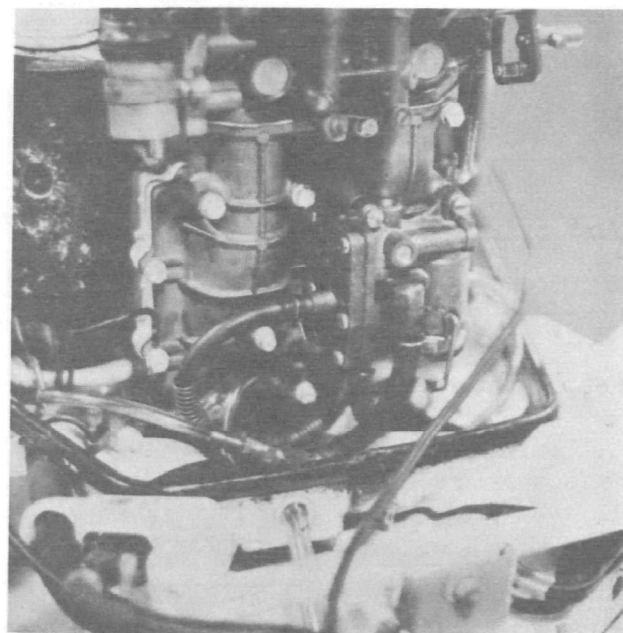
Modified inlet manifold installed on engine 10, showing routing of drain and return tubes (two drain tubes join at the tee just inside motor cover)
